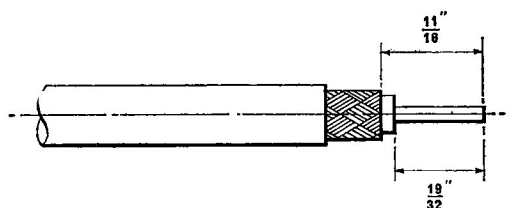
B—Assembly instructions—UHF Type plugs and sockets—With reducing adaptor
